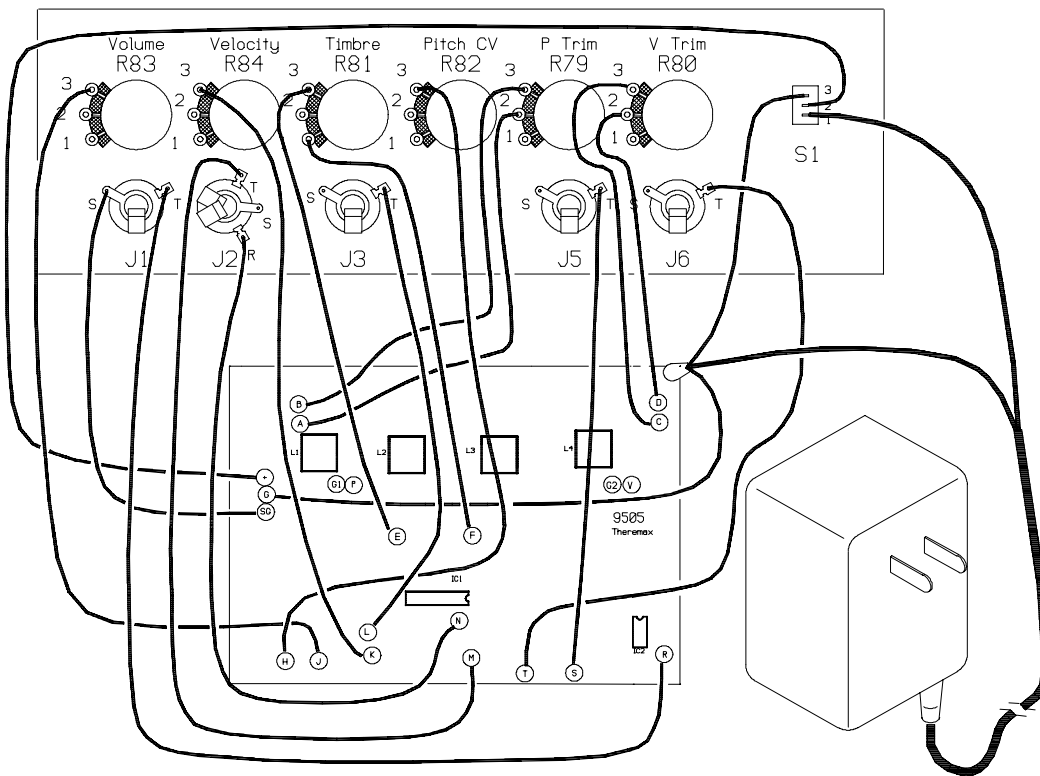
#22 insulated, stranded wire is used for connections between circuit board and front panel. Notice the solder lug which mounts under the circuit board mounting hardware and provides an important connection to the bottom plate.
